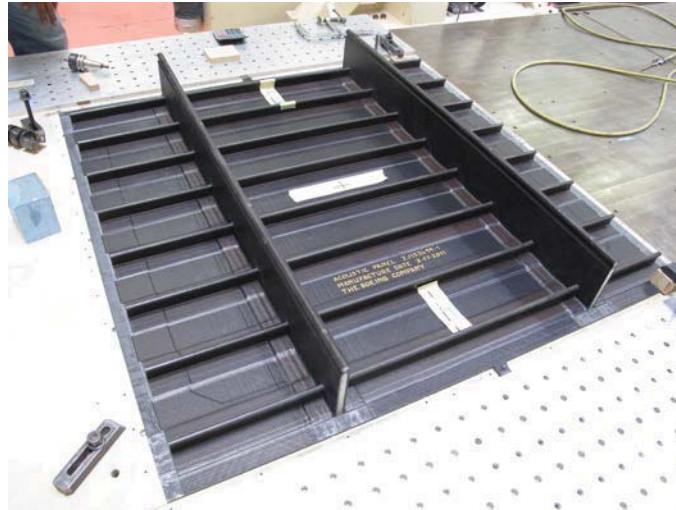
SPECIMEN EDGE TRIM MACHINING AT VENDOR FACILITY
